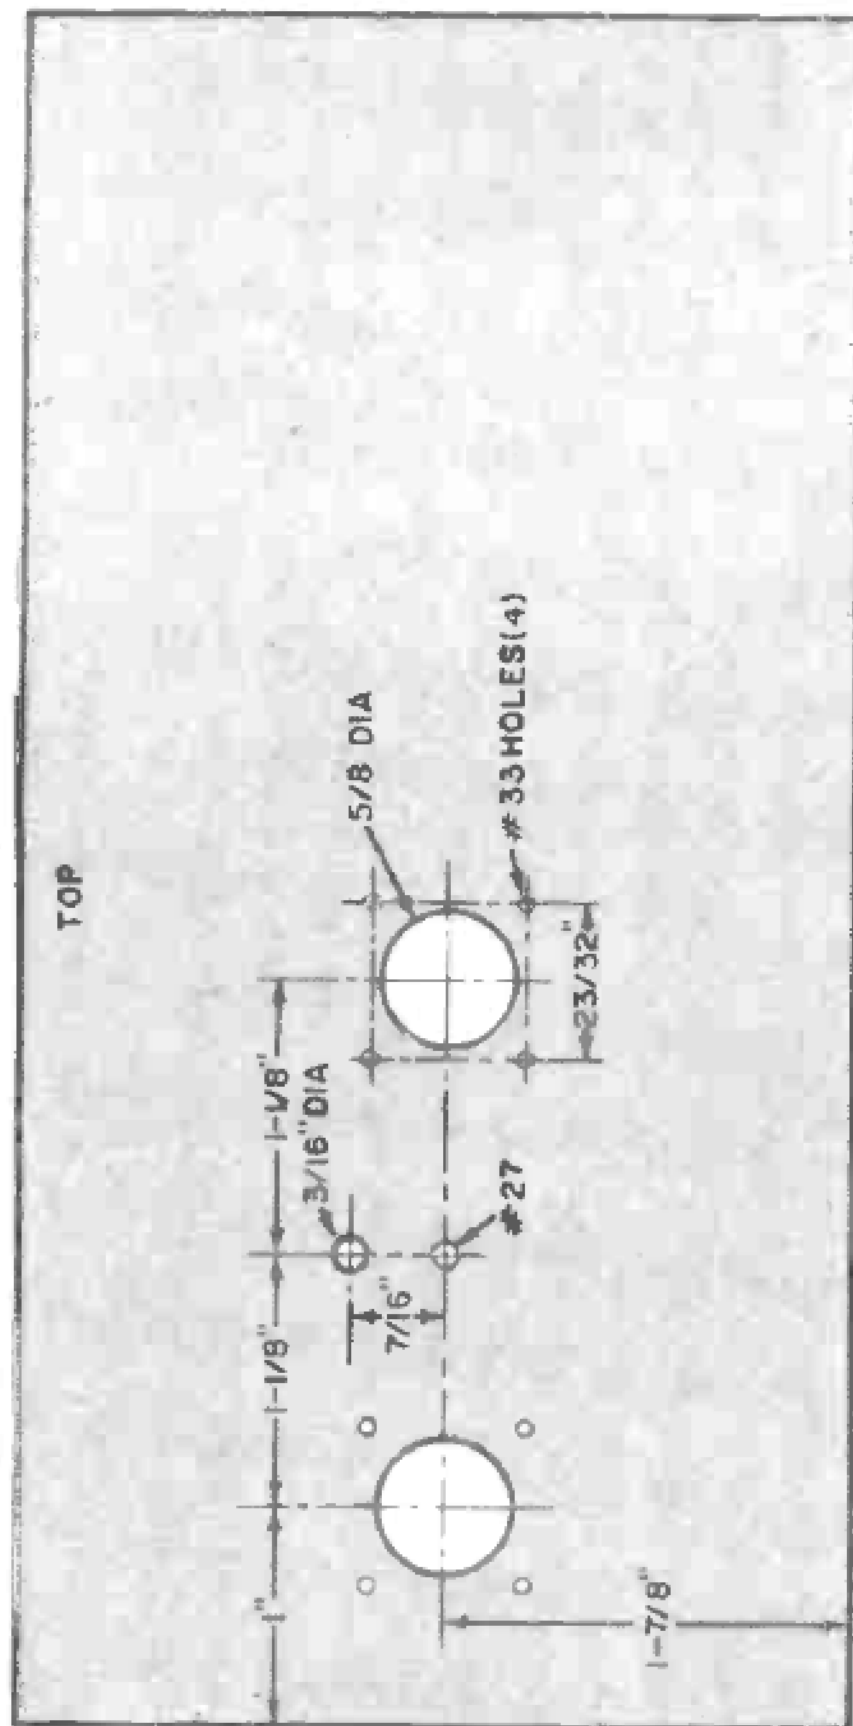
These are the chassis dimensions. The cut-out at the left mounts the circuit board while the one at right provides seating for the power transformer.
